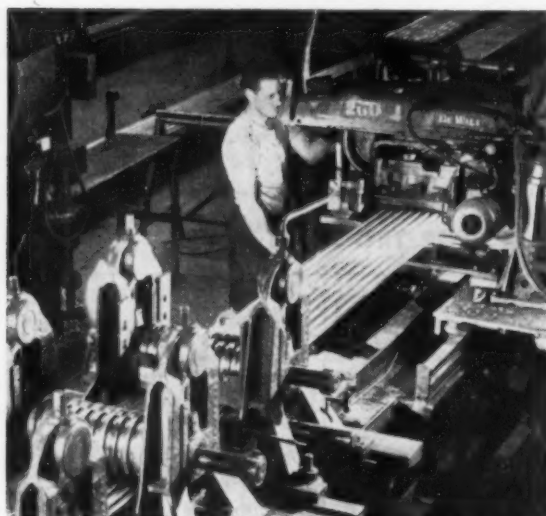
Typical draw-bench operation shows stainless sheet being pulled through rolls to form section.
